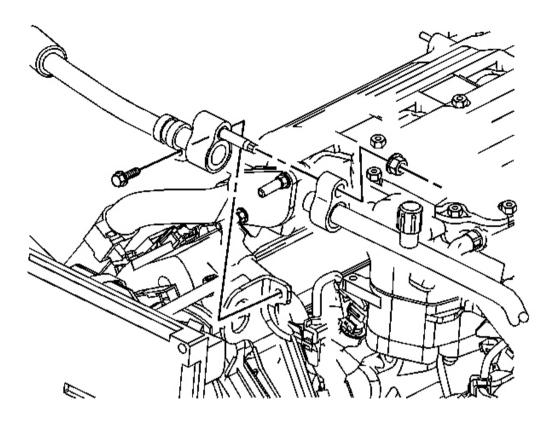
Compressor, Hose & Bolt Courtesy of GENERAL MOTORS CORP.
